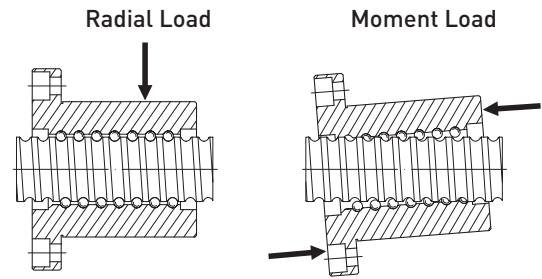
Unbalanced load distribution, due to misalignment between the support bearings and the nut, too rough machining of the bearing surface and/or inaccurate inclination or alignment of the nut flange.
